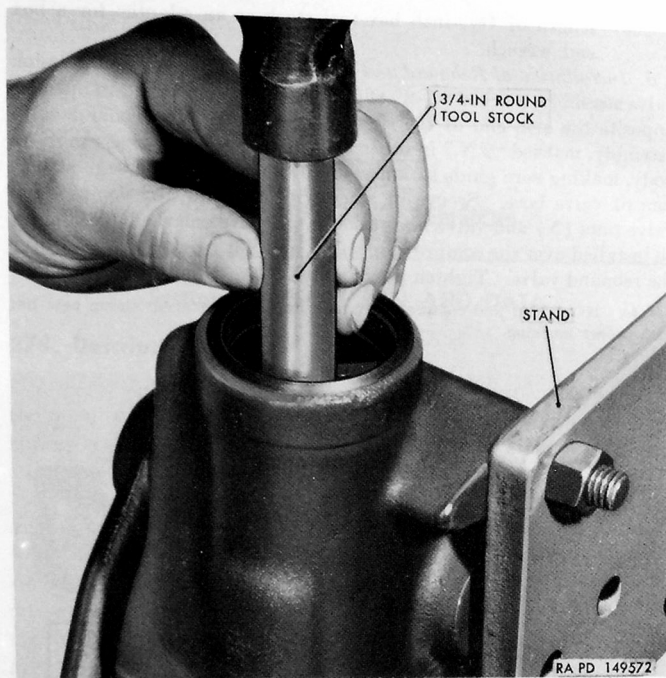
Installing intake valve spring retainer with shock absorber mounted in stand 41-S-4977-5.
